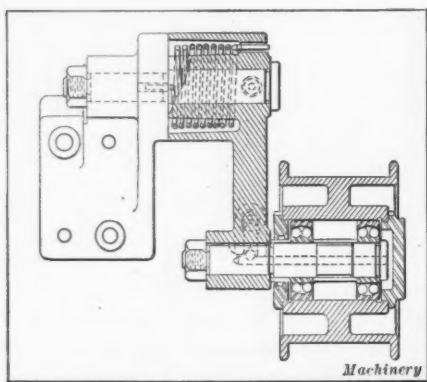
Idler Pulley for maintaining Constant Tension on Wheel-spindle Driving Belt
